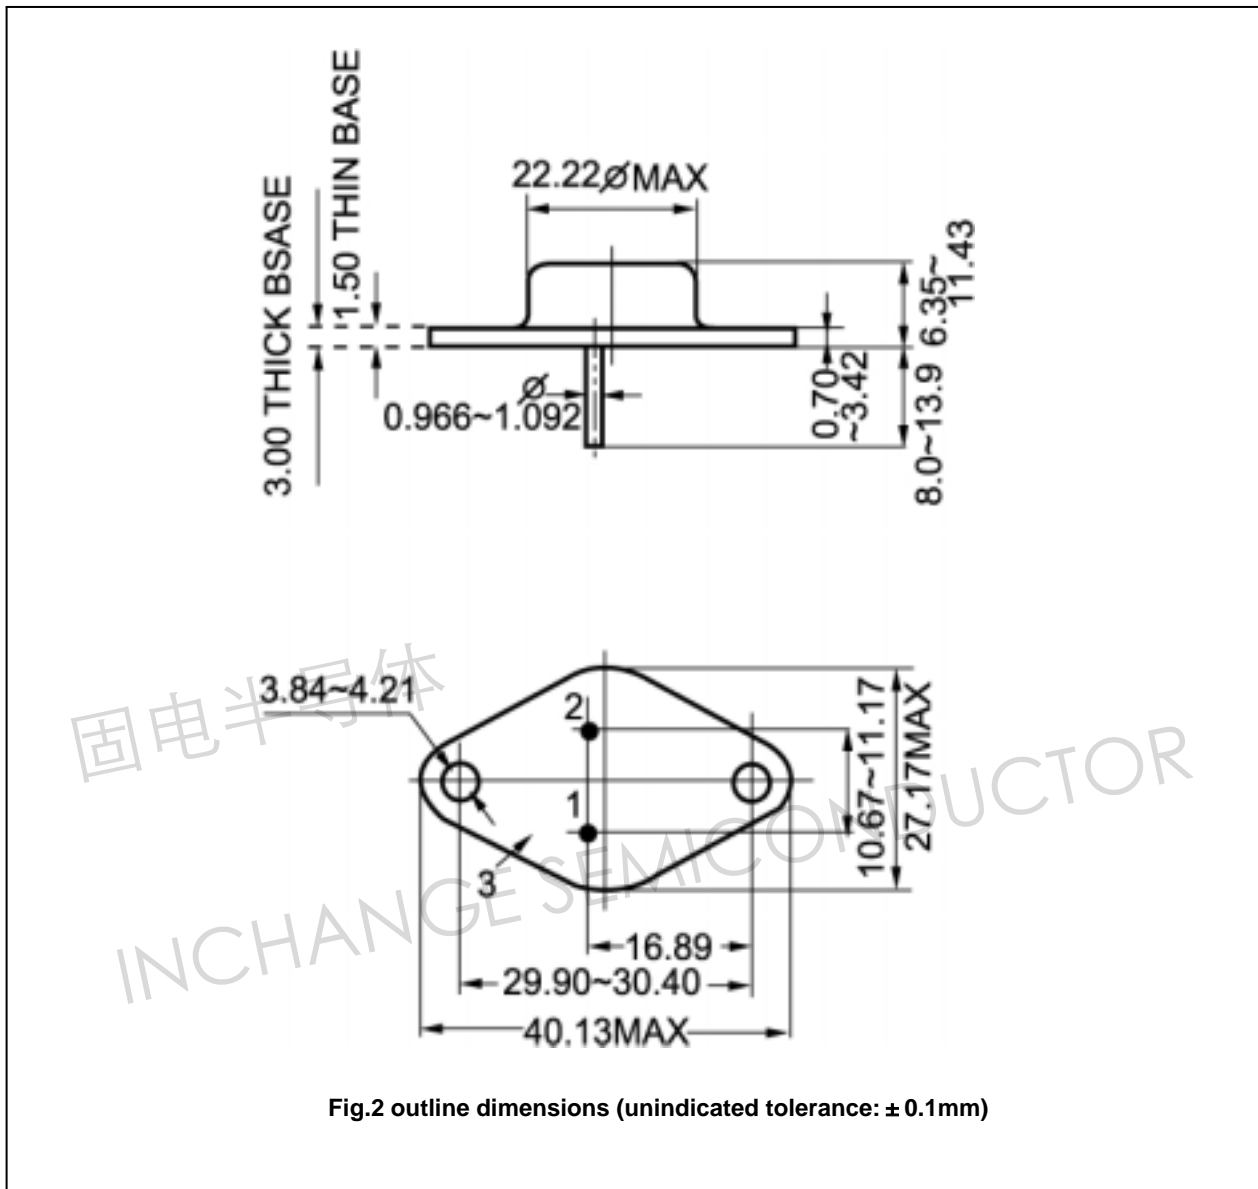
outline dimensions (unindicated tolerance:  $\pm 0.1$ mm)
